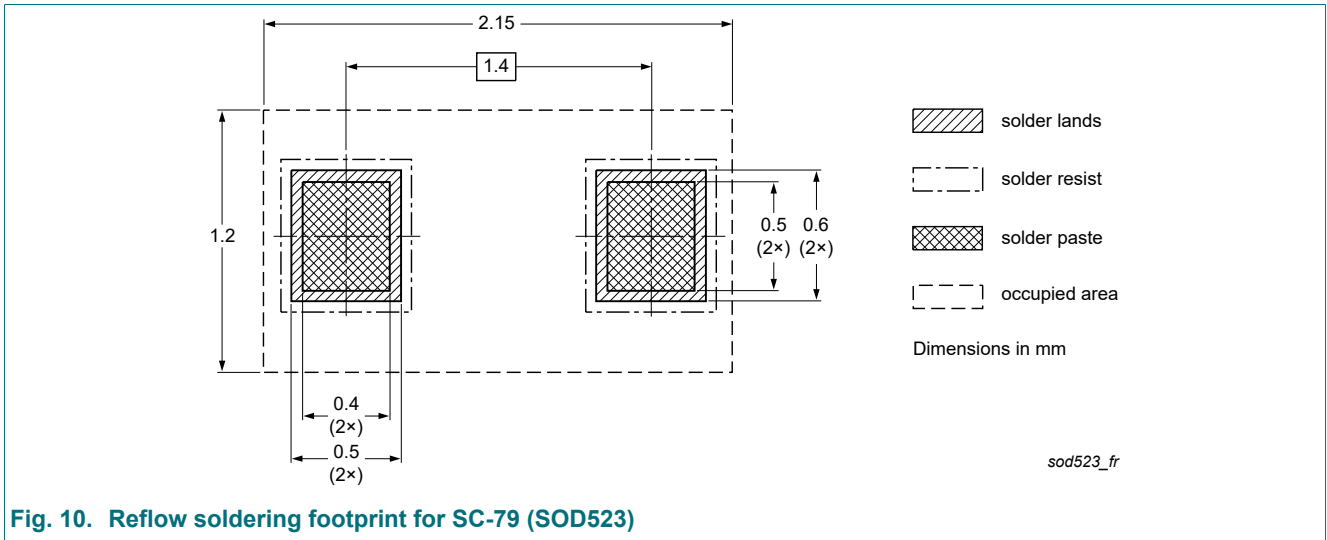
Reflow soldering footprint for SC-79 (SOD523)
